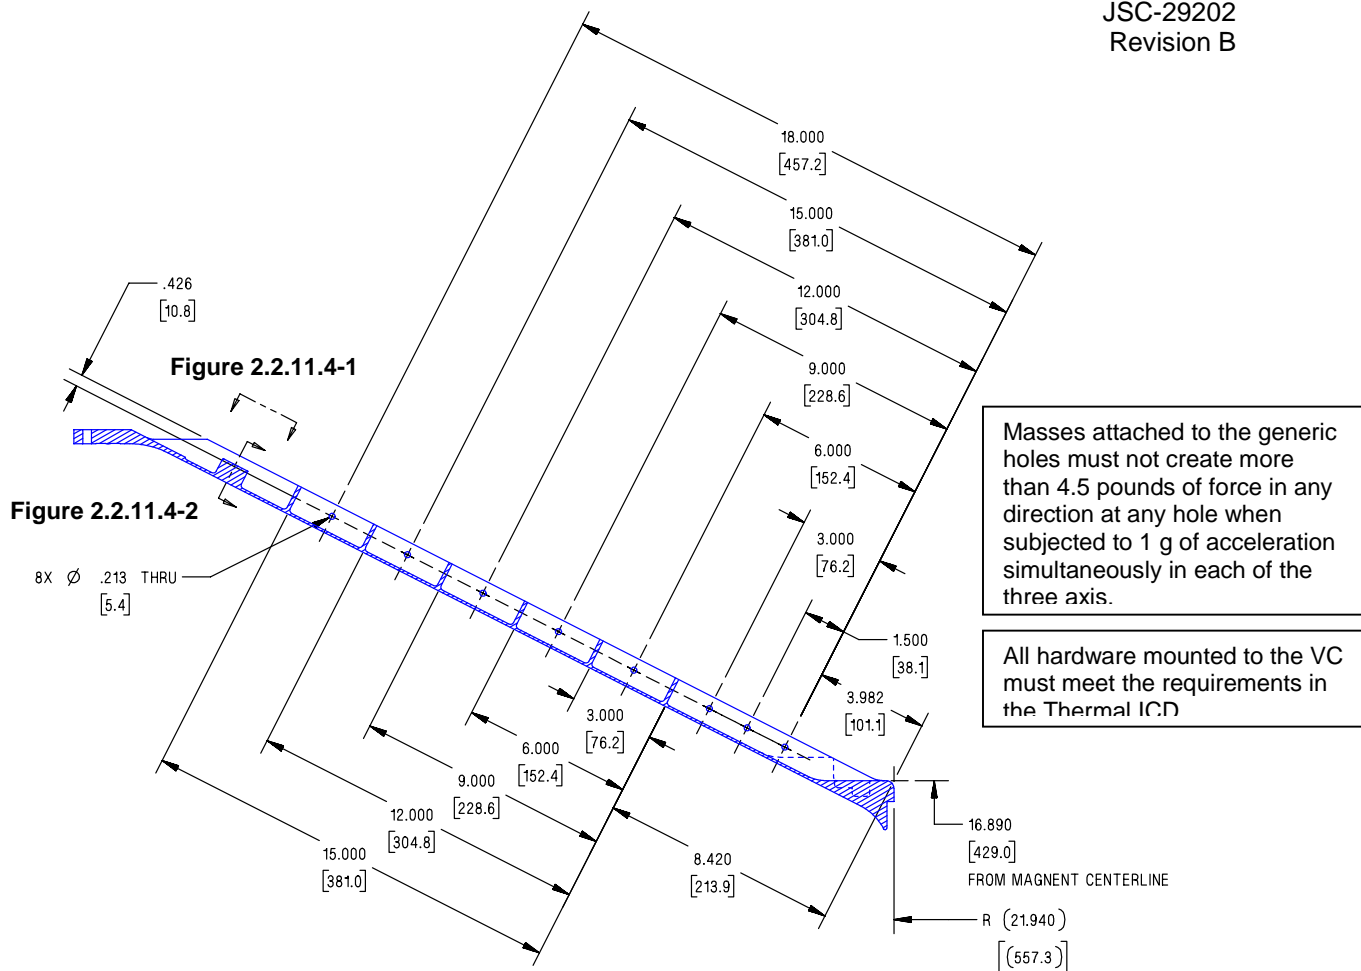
Generic Bolt Hole Pattern on Conical Flange Ribs
